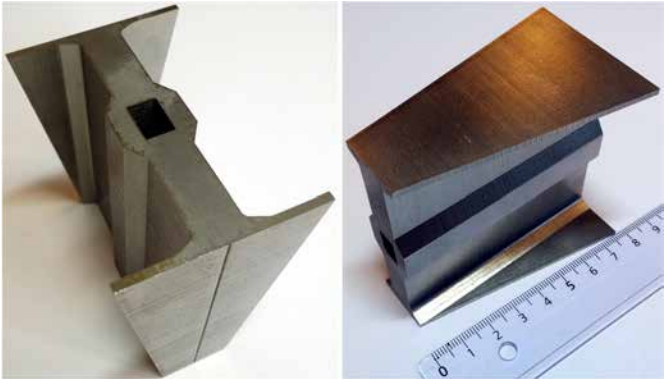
The stator tooth of the ferrite magnet SAT PMLDC motor.
